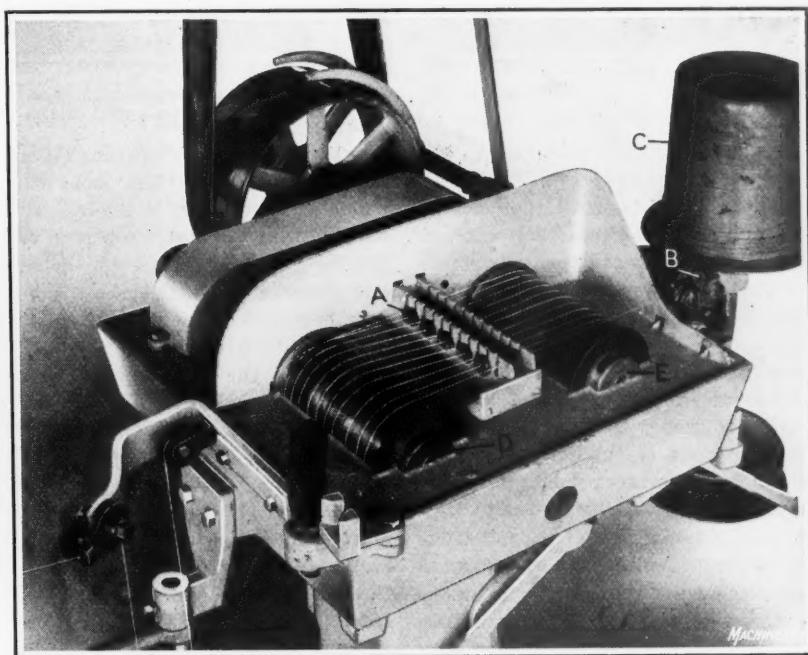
Wire-drawing Machine, showing Course of Wire during its Passage through the Dies
